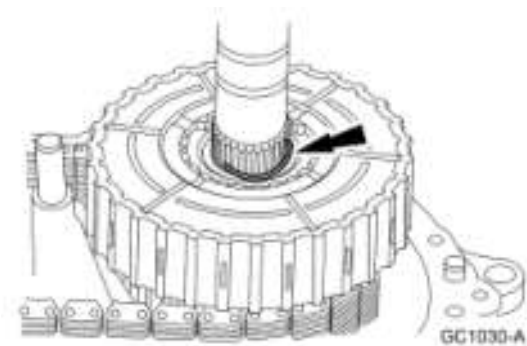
Locating Clutch Pack Assembly & Snap Ring
